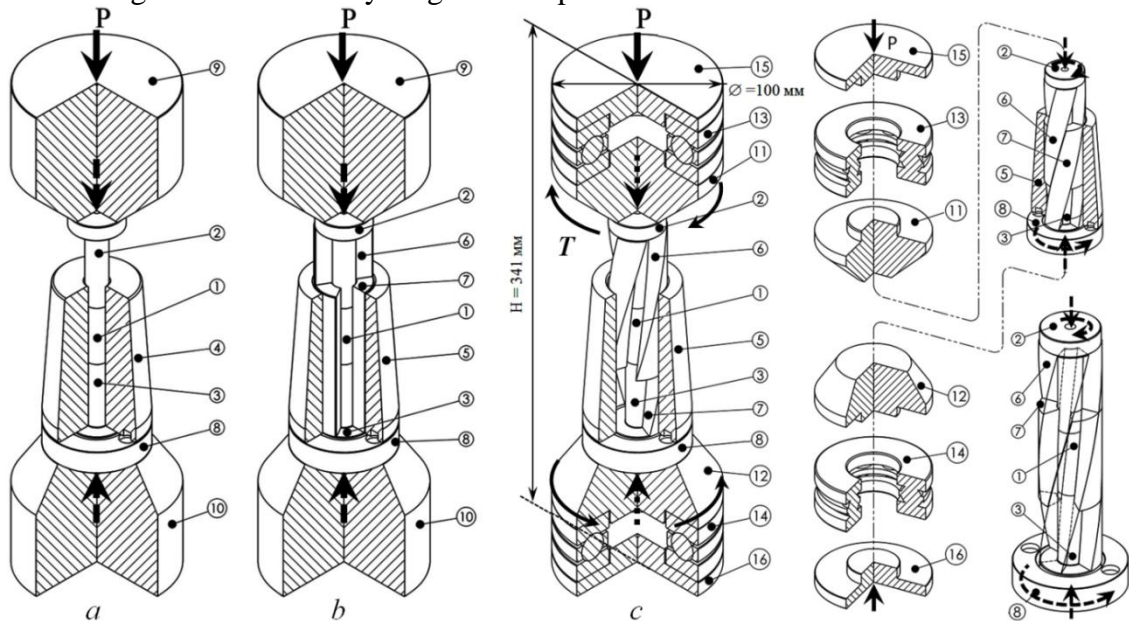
Ultrasonic mold to make uniformly dense ceramic of cylindrical body: (a) – conventional uniaxial single mold, (b) – collector mold, (c) – collector mold of spiral type (Novel mold): 1 – powder body (diameter 14 mm, height 20 mm), 2, 3 – upper and lower punches (plungers), respectively, 4 – matrix traditional mold, 5 – holder collector mold, 6 – parts (slider) of the first passive element, (N1 = 3 pcs.) 7 – parts (slider) of the second passive element, (N2 = 3 pcs.) 8 – centering support, 9 and 10 – the upper and lower support members of the mold, respectively, 11, 12, 15, 16 – element coupling swivel, 13, 14 – bearings top and bottom pivot bearing, respectively, P – direction of compression forces; T – is the torque acting upon on upper plunger.
